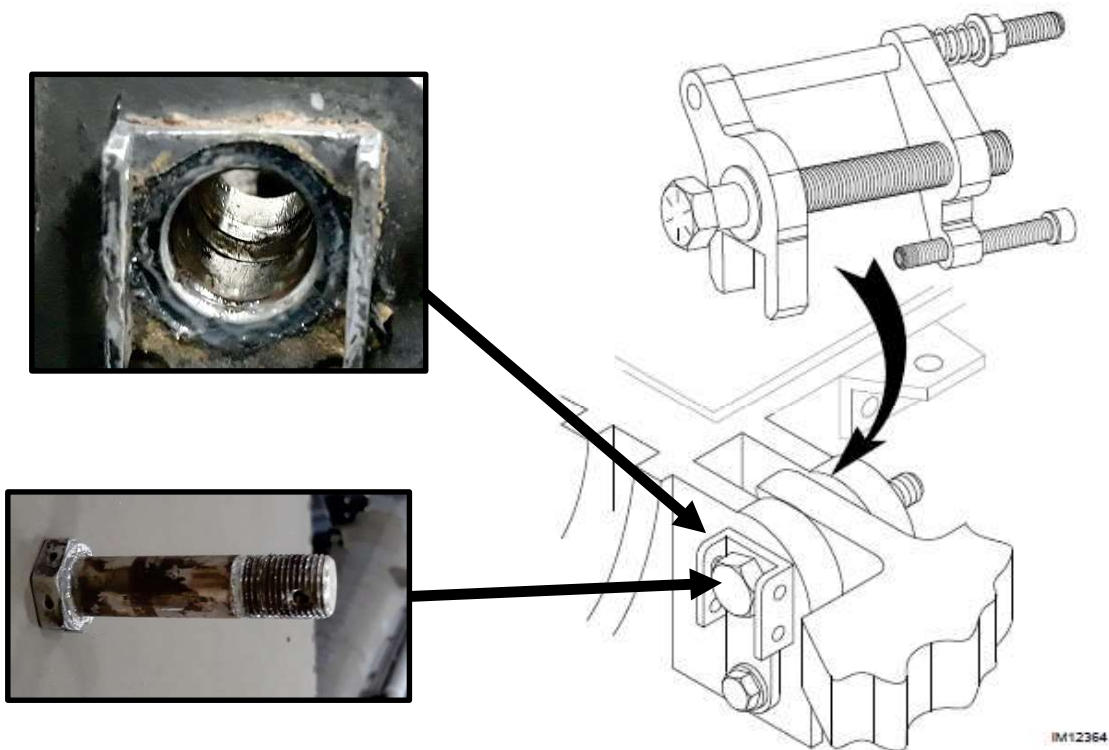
SPRC Clamp (WP 0623, TM 1-1520-280-23&P) Installation on the Bolt/Hinge Assembly
